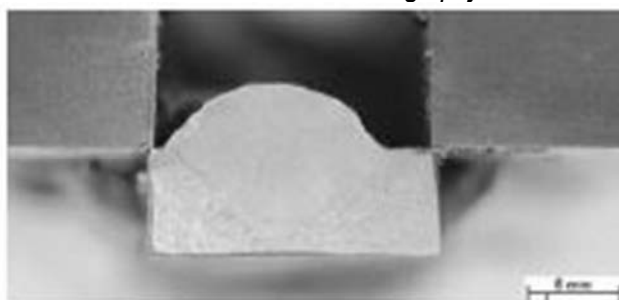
Root weld geometry of reference single pass weld without magnetic arc deflection
